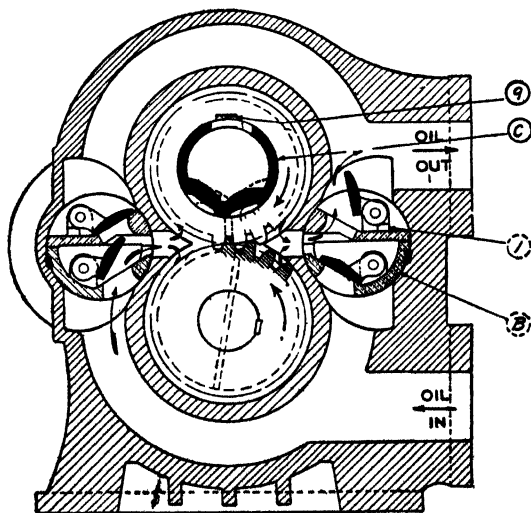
Sectional Drawing of Main Oil Pump, Showing Constructional Details of Fig. 250
